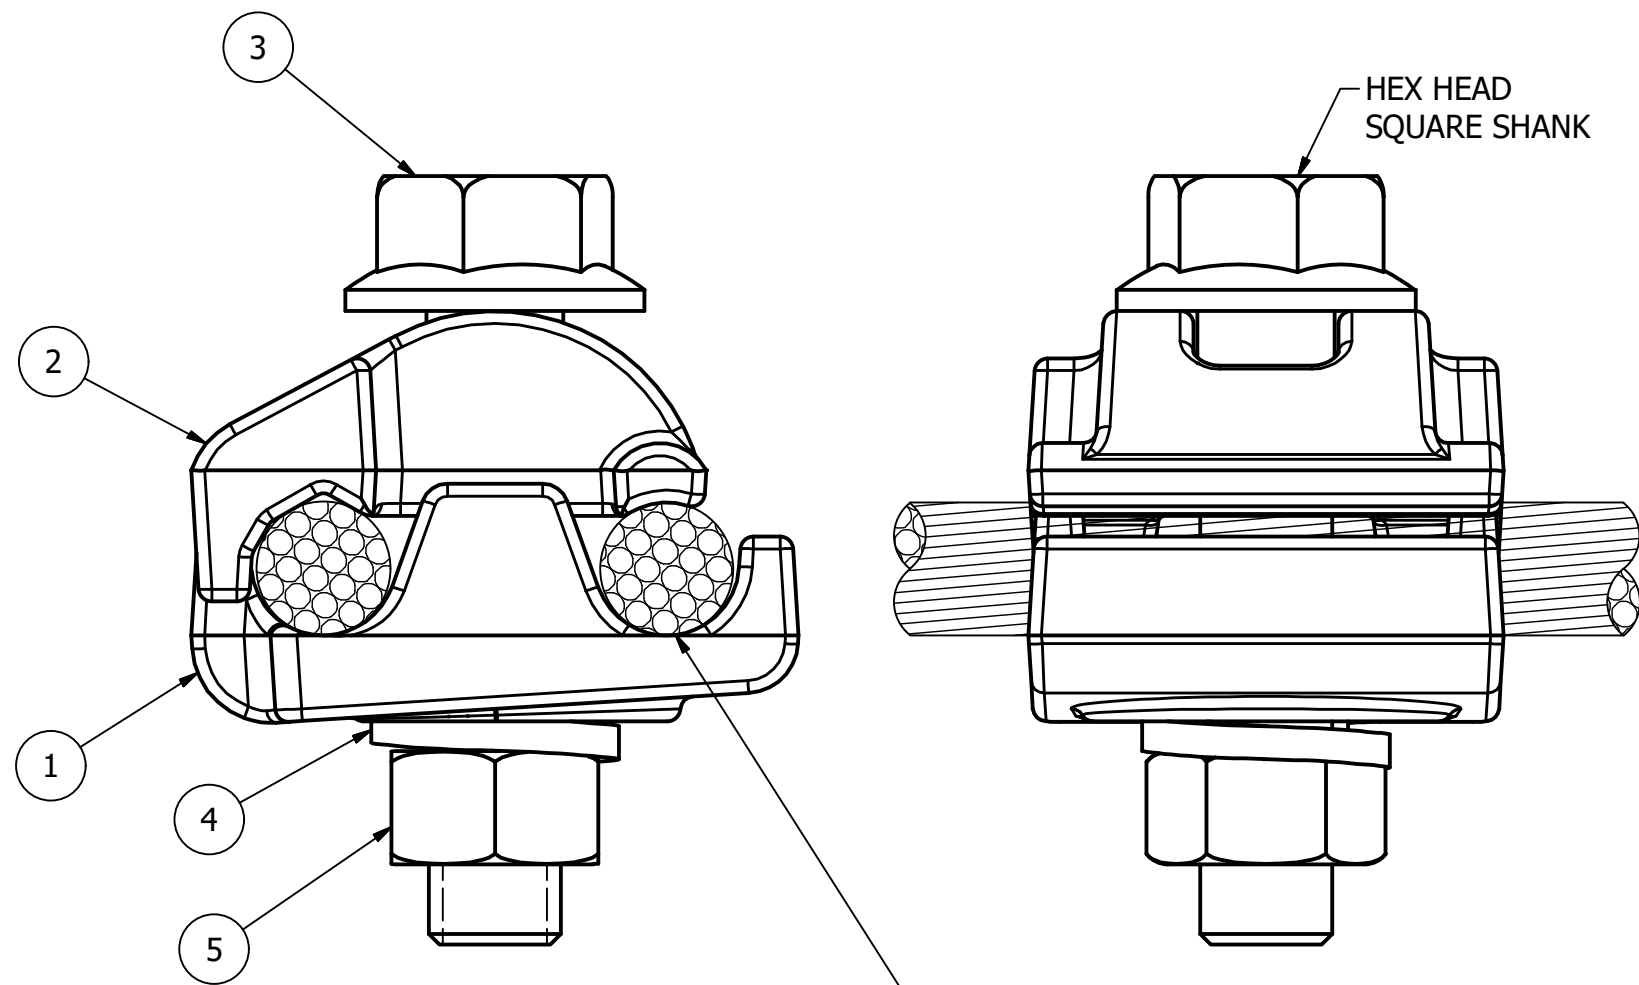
COPPER LINING IN TAP GROOVE ON TOP AND BOTTOM CASTING
